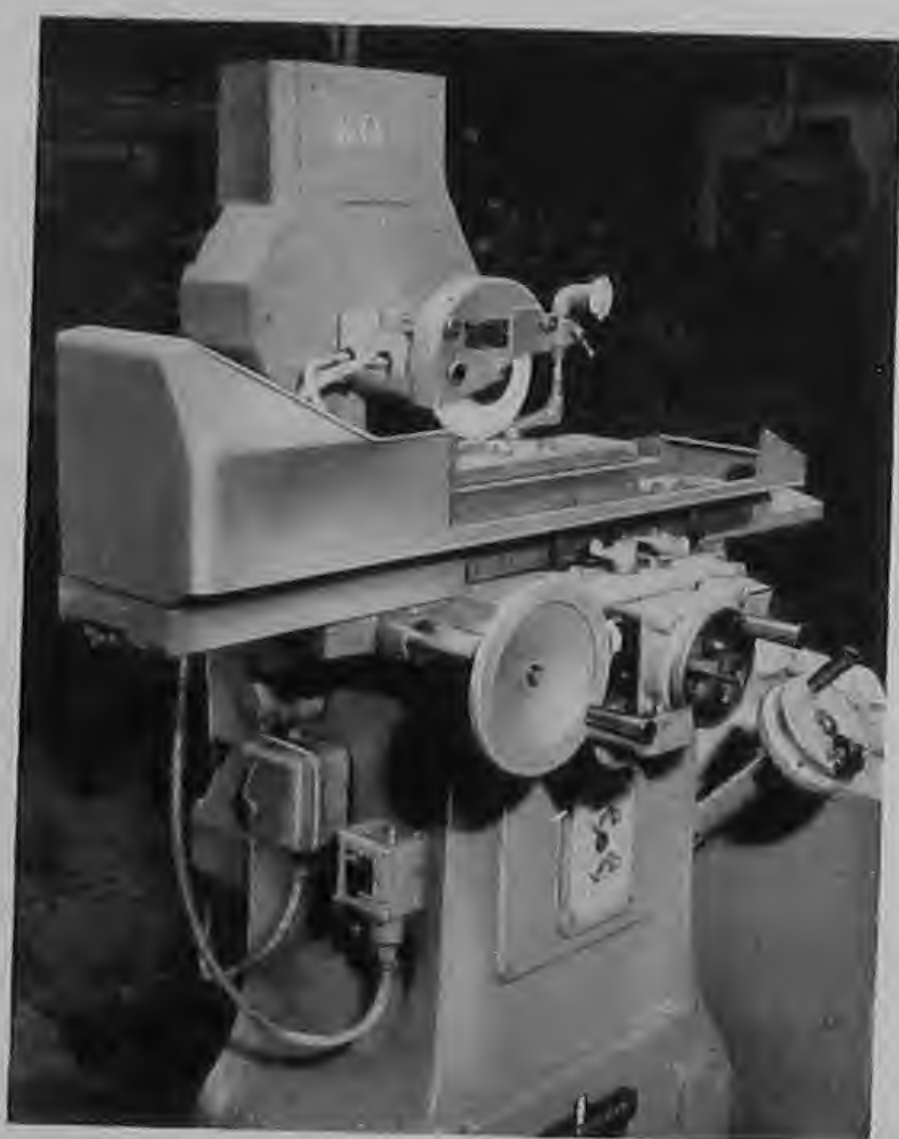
A Jones and Shipman type 540 surface grinding machine which has been fitted with a conversion wheelhead produced by Westwind Turbines Ltd. The air bearing head is interchangeable with the conventional type and is belt driven
